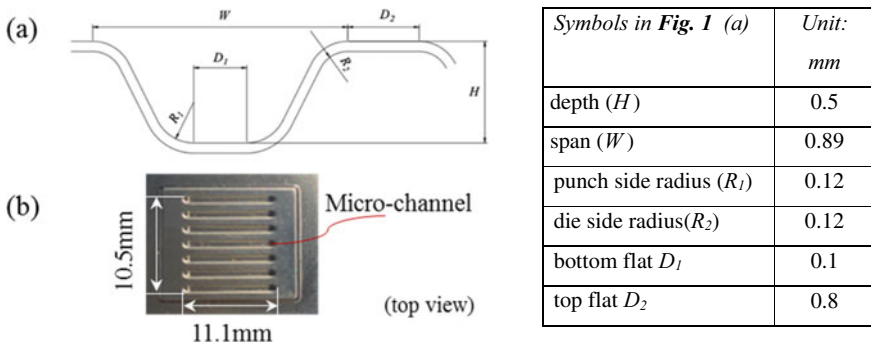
a Schematic and dimensions of the target corrugation profile b a micro-stamped sample
